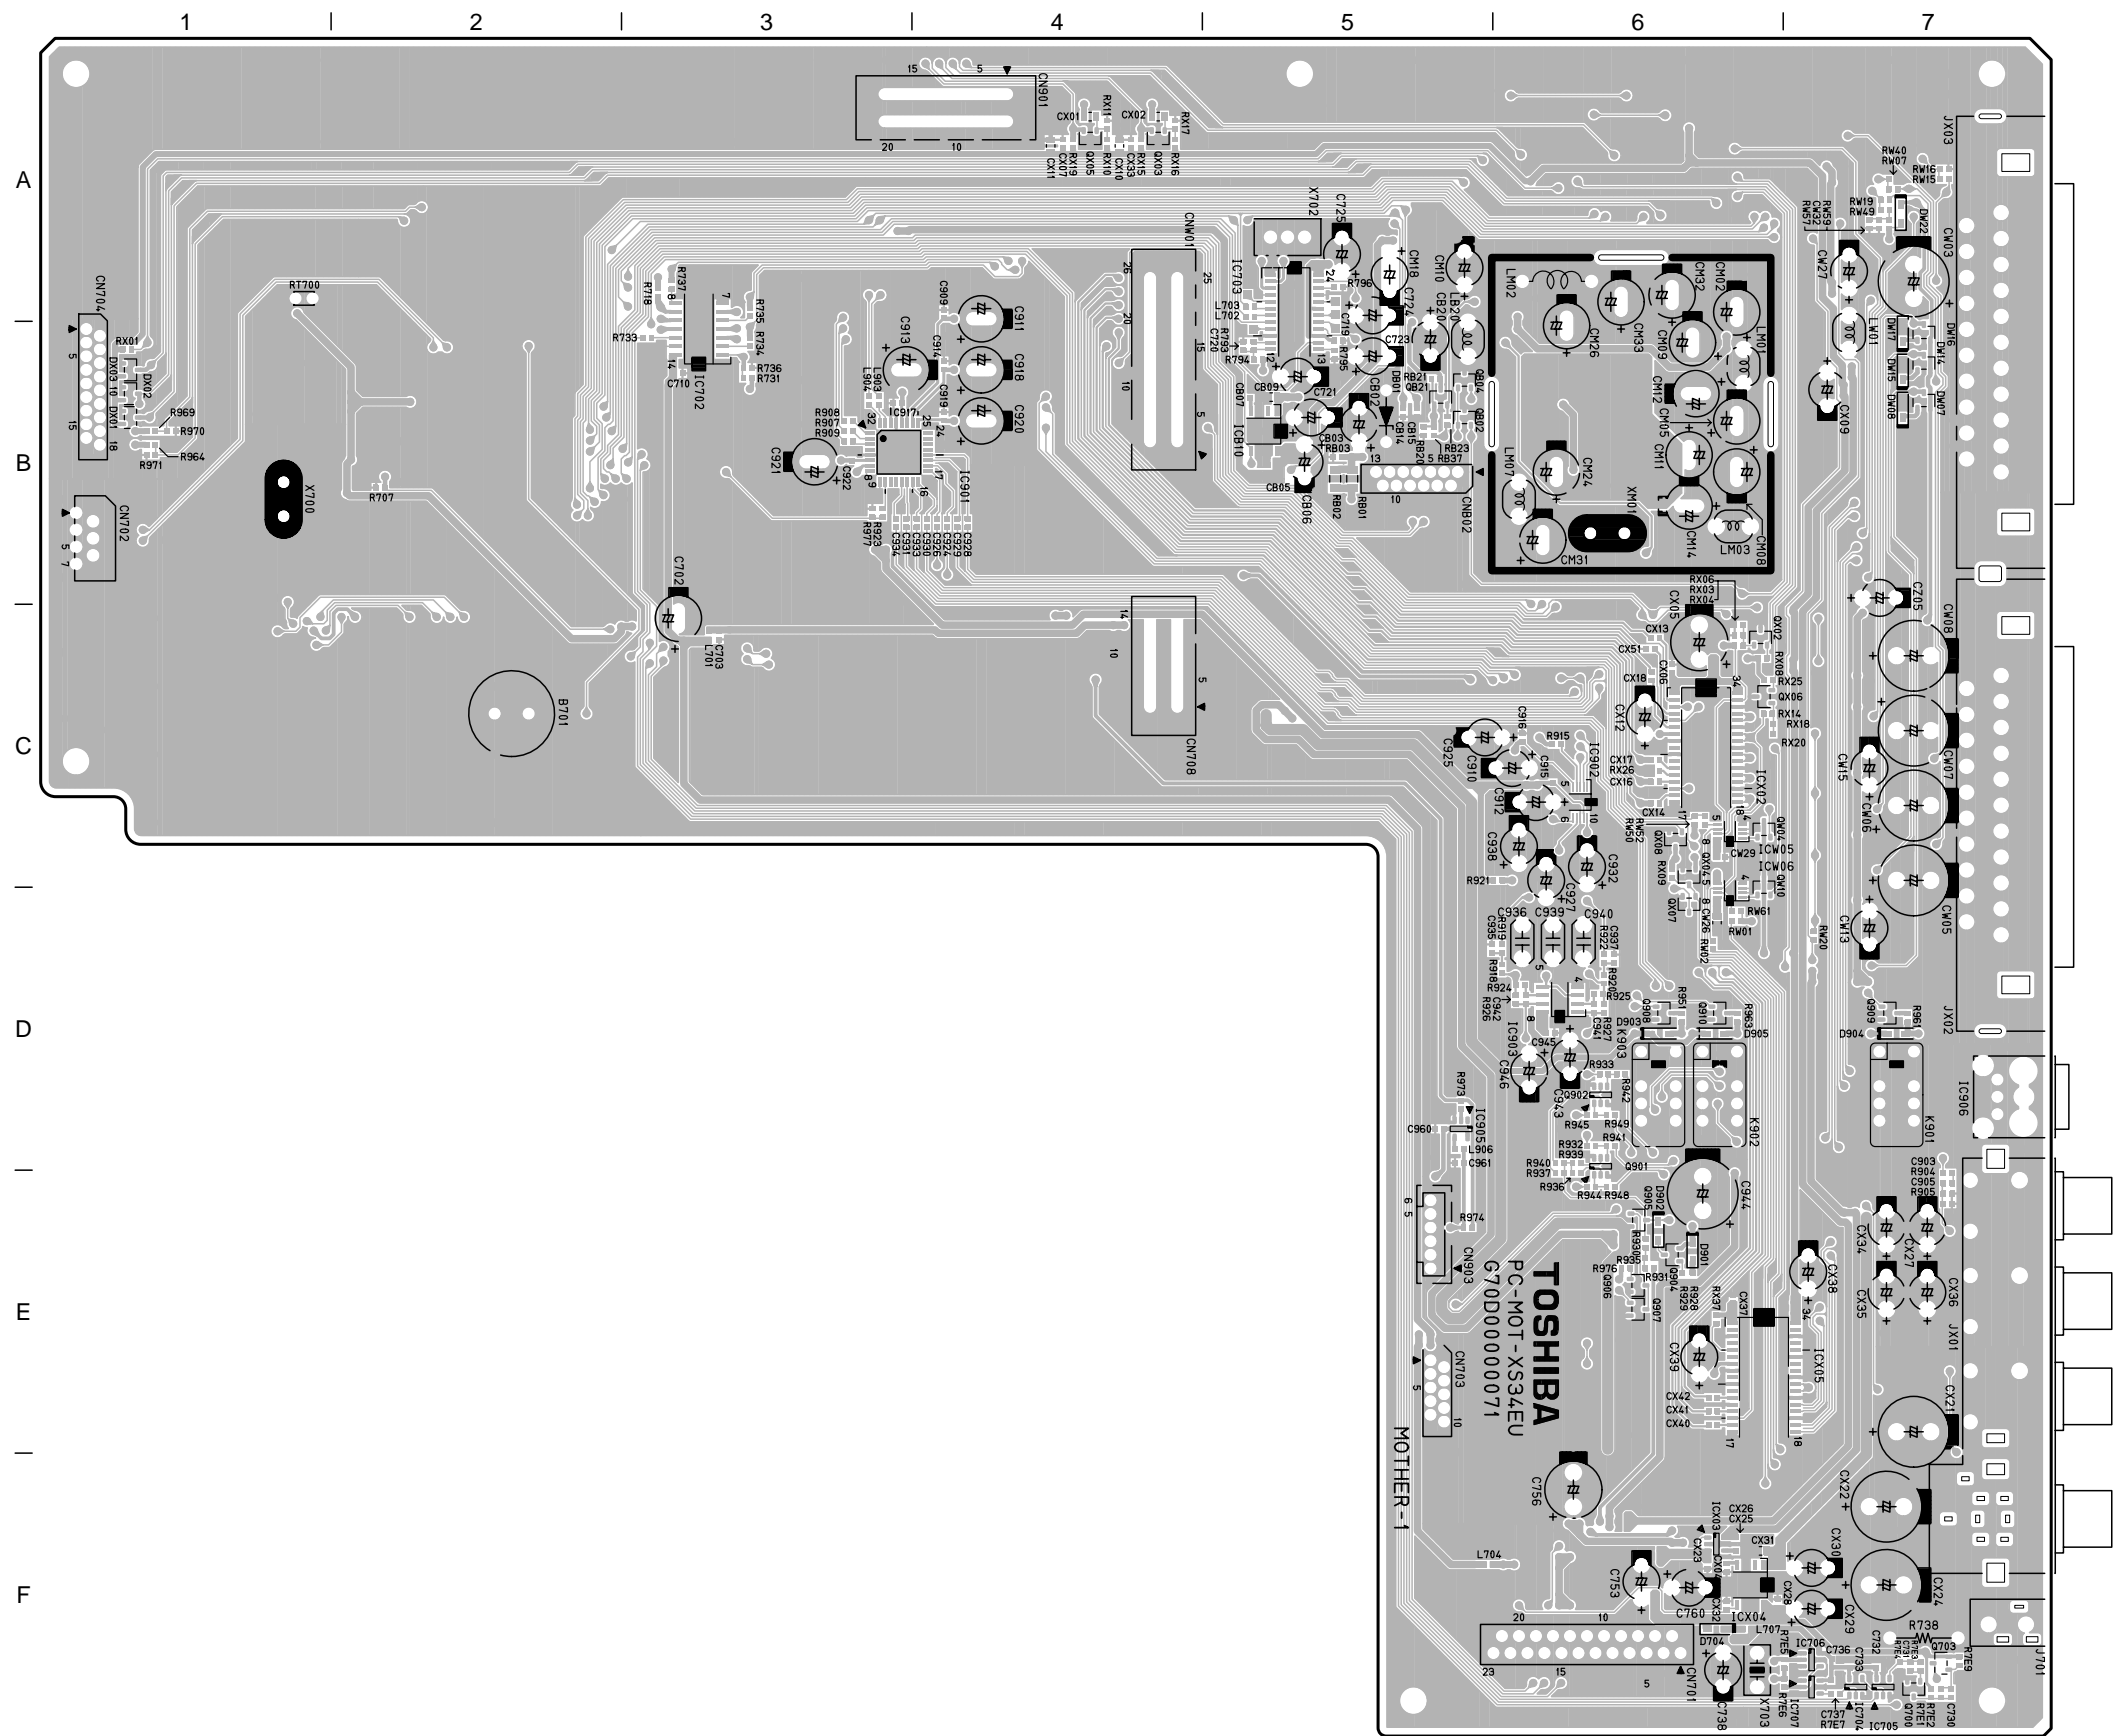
EU05 Mother PC Board (Top side)
